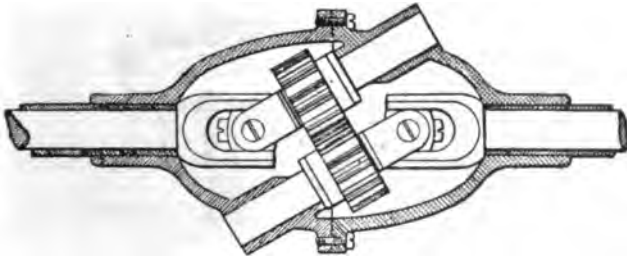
A Universal Joint Differential. The sprocket or spur drive turns the sleeve which holds the gear case here shown in section. So long as travel is straight ahead neither pinion rotates on its axis, but as soon as a turn is made rotation begins, thus allowing compensation of the motion of the two wheels of the wagon.
